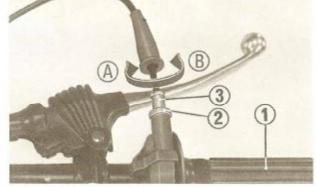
(1) Throttle grip (2) Lock nut (3) Throttle cable adjuster
